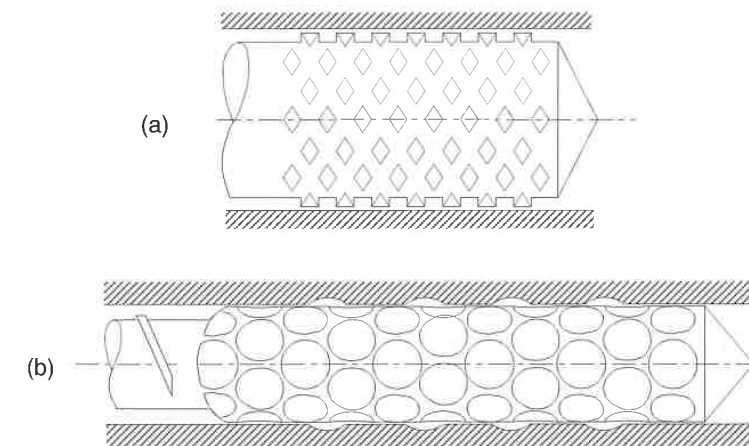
Distributive mixing sections: (a) Pineapple mixing section, (b) cavity transfer mixing section.
